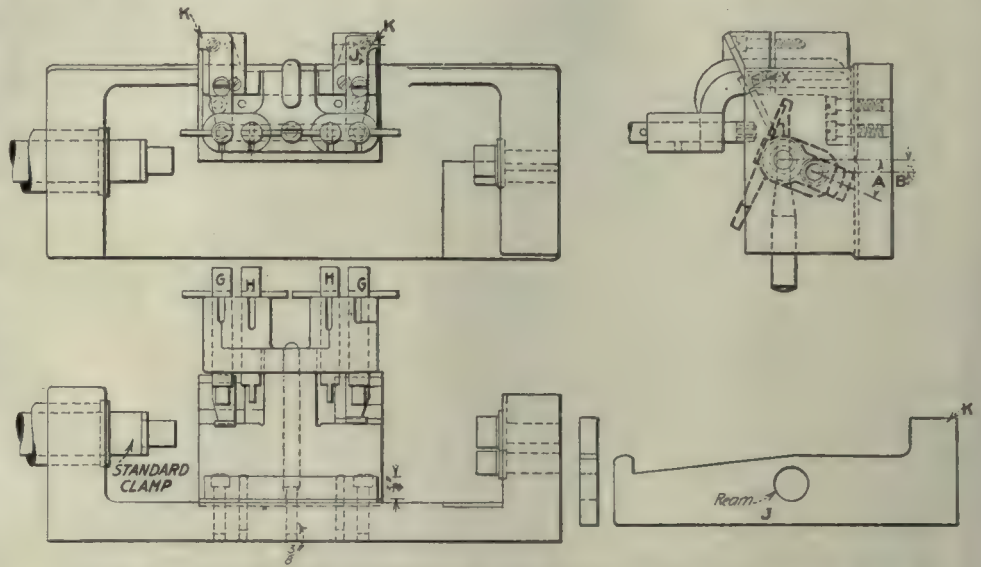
DEPTH AND POSITION GAGE FOR EJECTOR CLEARANCE CUT
